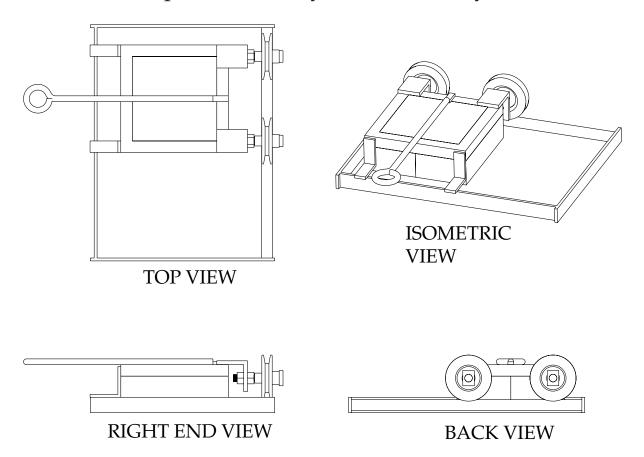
Three views of the door and rack system and an isometric view. The frame or rack is positioned on the furnace and its elevation above the furnace determines the space between the door and furnace lip. When used as a foundry furnace the space should be set at 1/8" but with a glass furnace it should be raised to maybe 3/16" or even 1/4" depending on how sloppy you are. In all cases the right leading edge of the door will always be a little open to act as a flue for the furnace. On minimum combustion the door will be open about 1/4 of an inch, but on full tilt it will need to be open to maybe 1/2" or even 3/4" depending on your combustion requirements.
